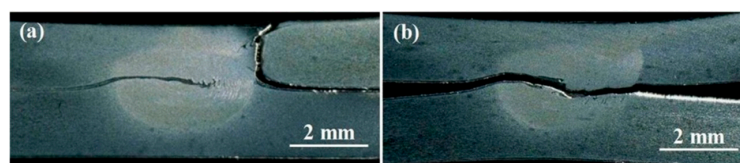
Enlarged views of the failed joint (100 mm/min): (a) AS loading; (b) RS loading [9].
